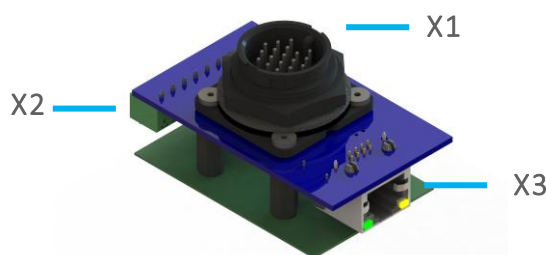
Mechanical Mounting of AMI5000 Remote Pendant
